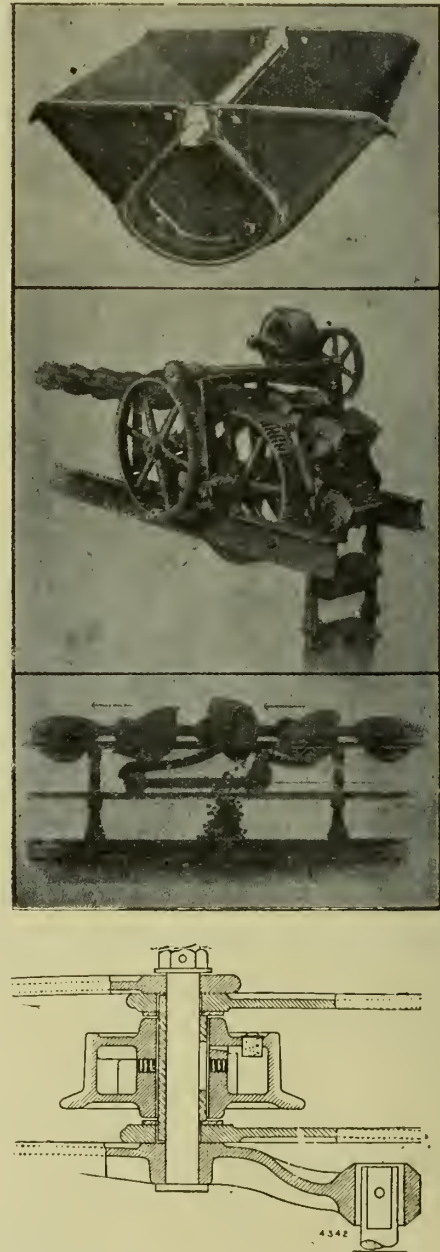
Details of Peck Pivoted Bucket Carrier.
